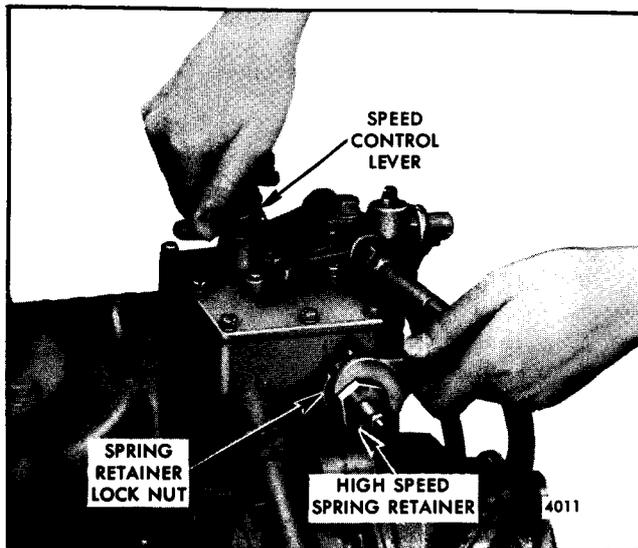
Adjusting Maximum No-Load Engine Speed
